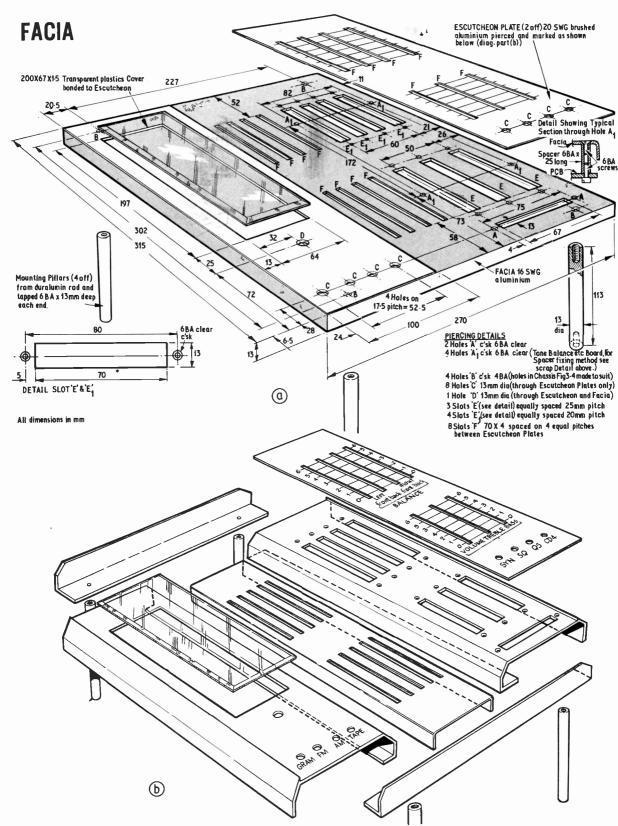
Construction of the facia. The upper drawing (a) shows the method of assembly using "home-made" aluminium panels and the lower drawing (b) shows the method of assembly using ready-made aluminium extrusions
